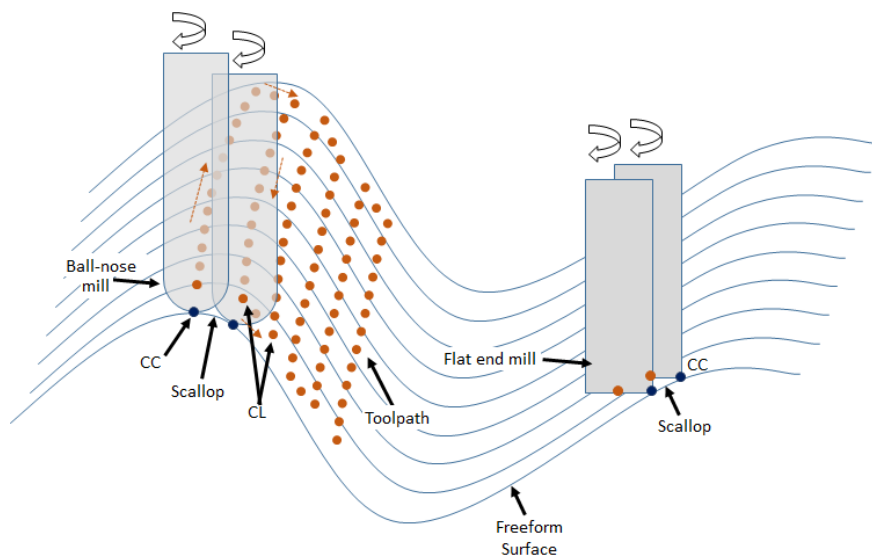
Cutter location (CL), cutter contact (CC), toolpath and scallop in point milling of a freeform surface
